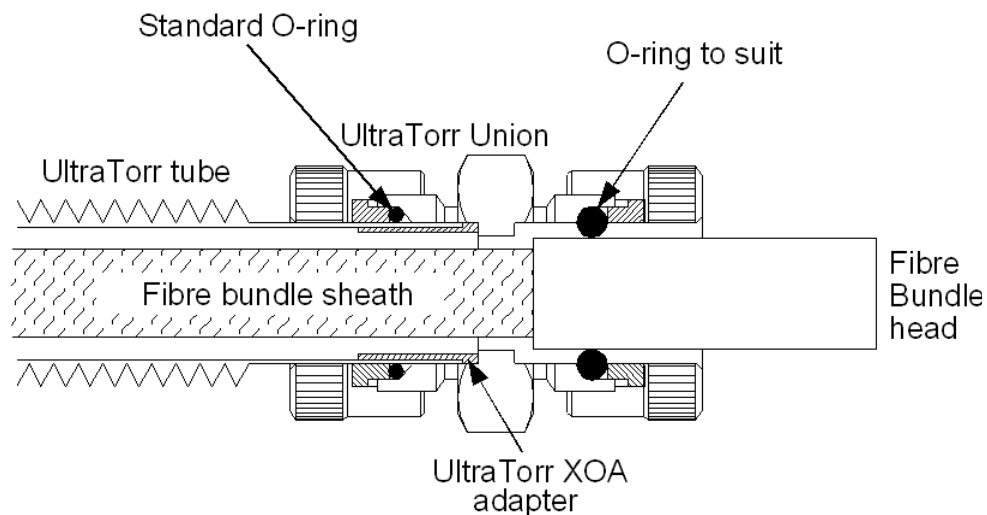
Interior view showing the collection end of the feed-through, drawn to scale
